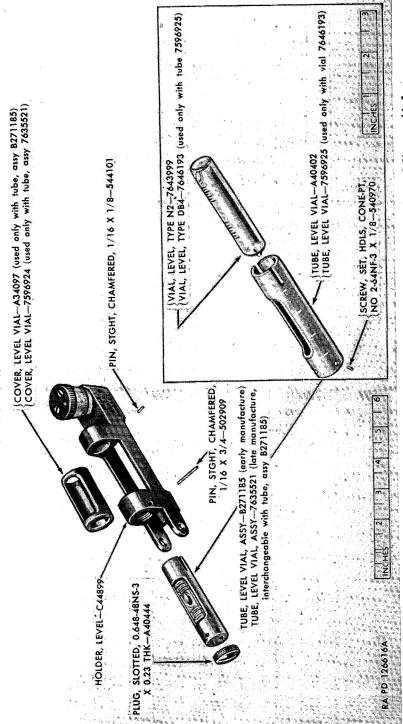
Level vial tube assembly B271185 or 7635521 removed from level holder and disassembled.
